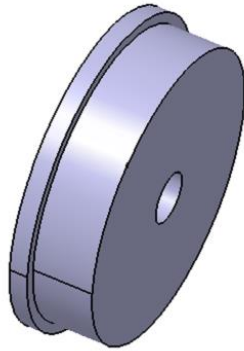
Jack bar inserts to be welded into tube. The hole is tapped for an M5 bolt.
